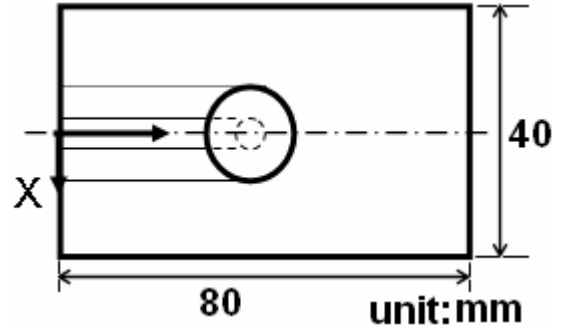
Geometric shape drawing of workpiece for FEM simulation (top view)
